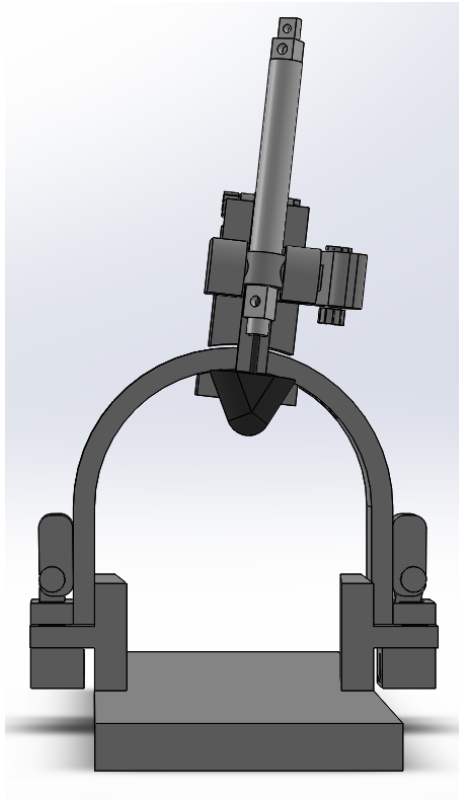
3D model of a mechanical tapping device assembly (Front view)
